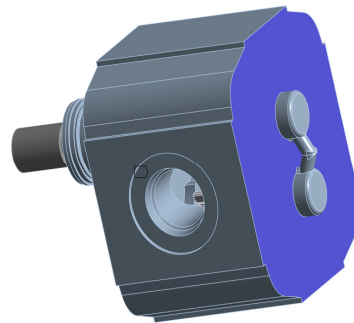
3D model of the gear pump with mesh generated using ANSYS
